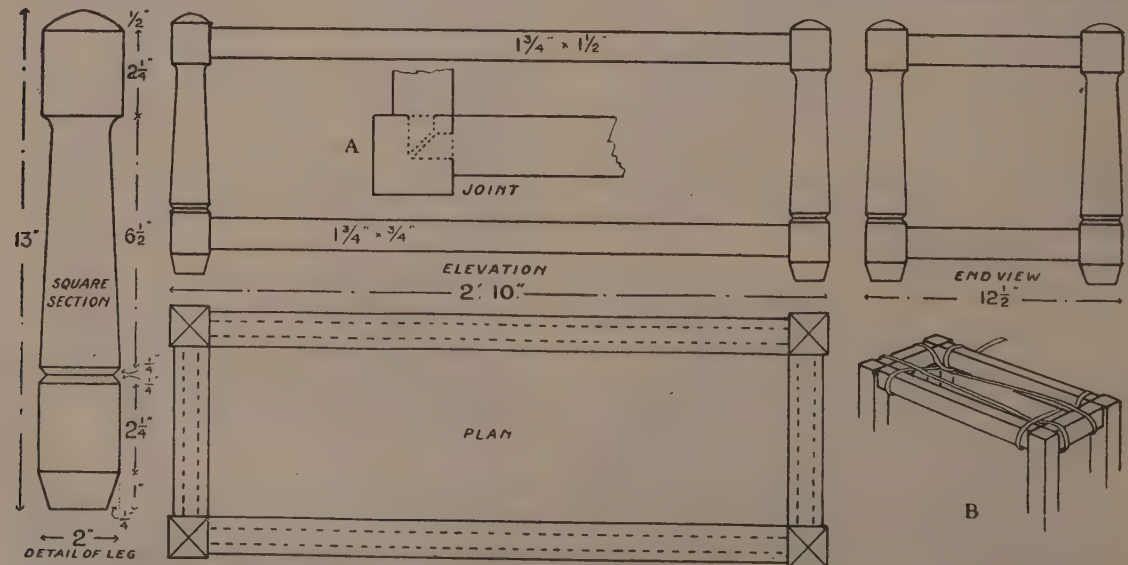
ELEVATIONS, PLAN, DETAIL OF LEG, AND (B) DETAIL OF RUSH WEAVING.
